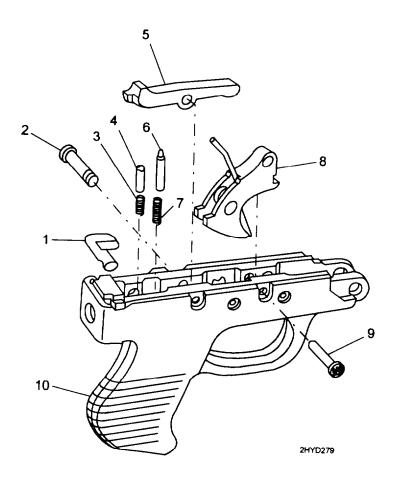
Group 05 Trigger Mechanism Grip Assembly (M60 only), PN 7269202
